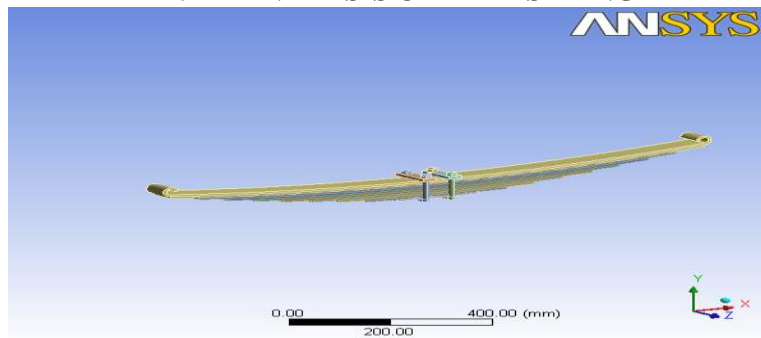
Assembly of leaf spring in Ansys 11 work bench
